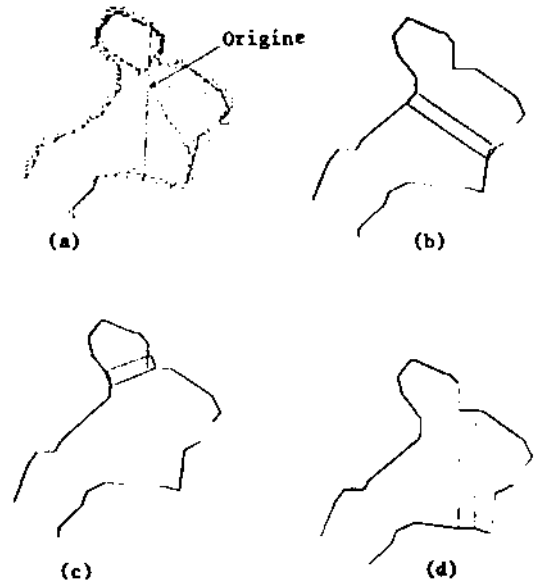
Extraction of a workpiece silhouette (the one with an star on Figure 2)(a) and three possible grasps (b), (d).
